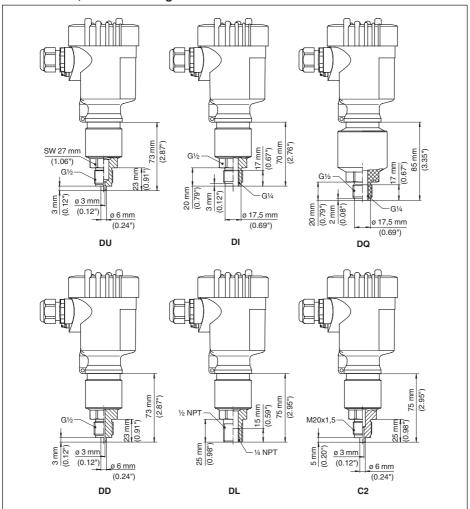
VEGABAR 82, threaded fitting not front-flush
